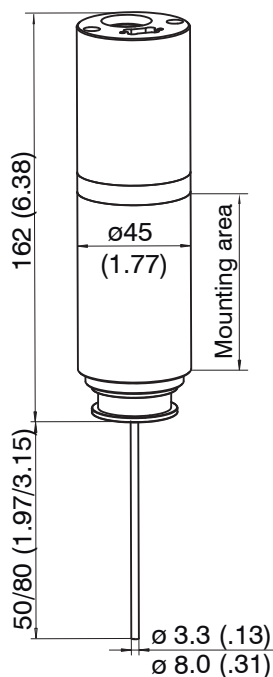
Dimensional drawing rotation unit with sensor lance, dimensions in mm (inches)
